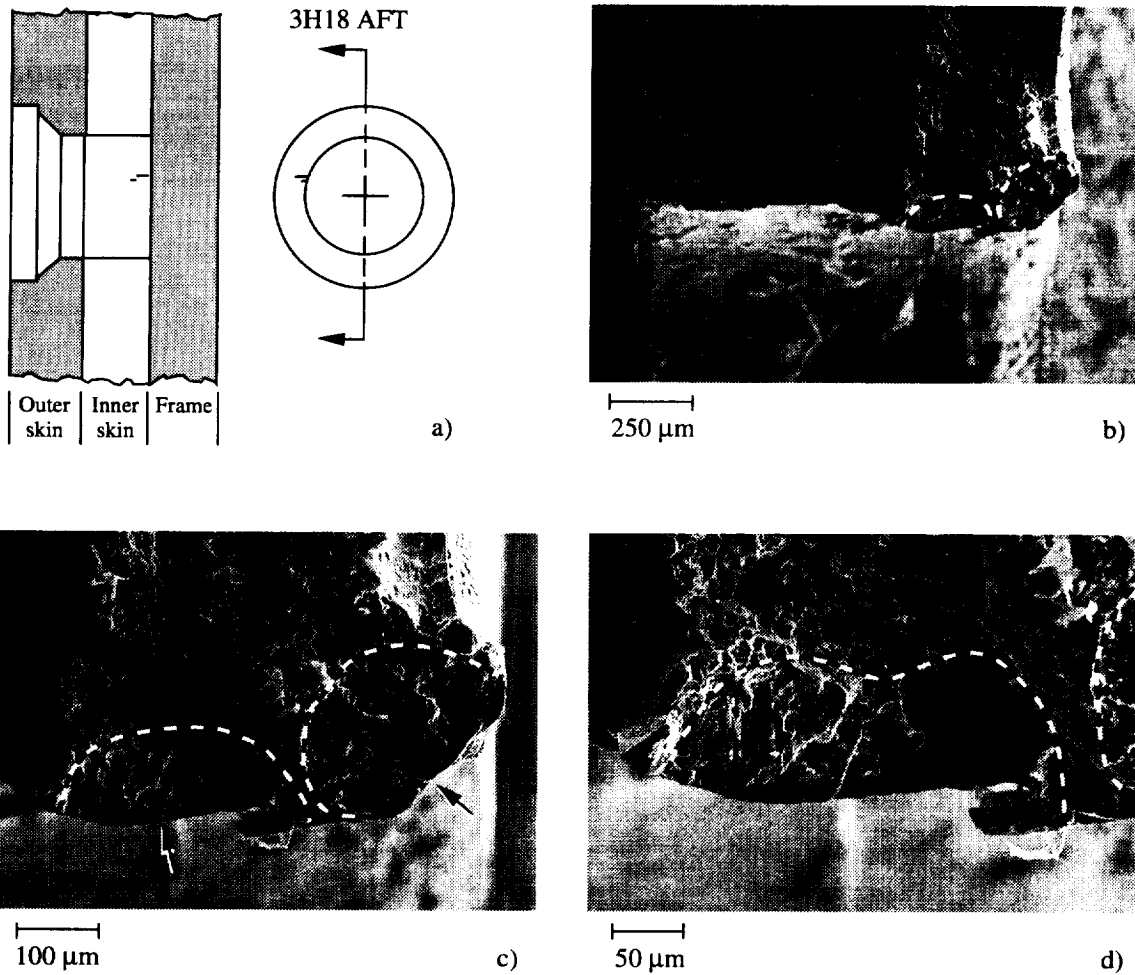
a) The schematic shows the rivet hole 3H18 configuration and the location of two inner skin fatigue cracks oriented in the aft direction above the 9 o'clock position. b) The SEM micrograph shows the fatigue cracks at the inboard corner of the rivet hole and at the rivet hole surface. The dashed lines mark the fatigue crack front. c) The SEM micrograph shows the region of crack initiation (arrows) of the inboard corner and surface fatigue cracks. The dashed lines mark the fatigue crack fronts. d) The SEM micrograph shows the rivet hole surface crack at high magnification.
